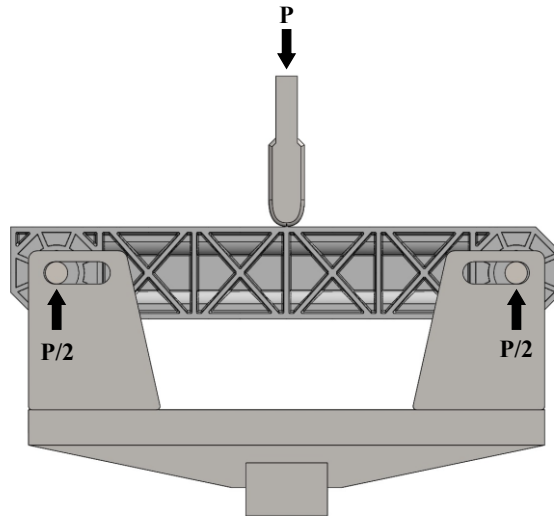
3-point bend fixture with single L-bracket arm.
